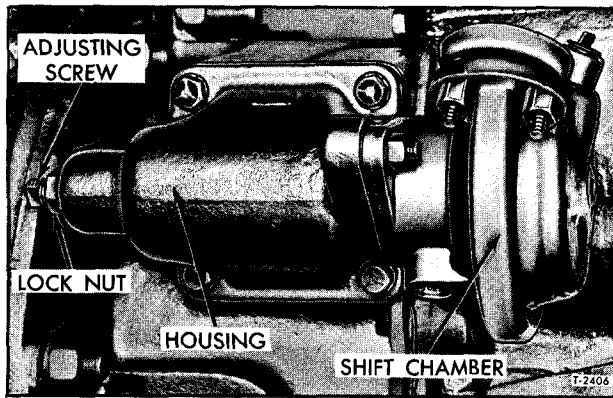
Inter-Axle Shift Chamber and Housing Installed (Rockwell)
